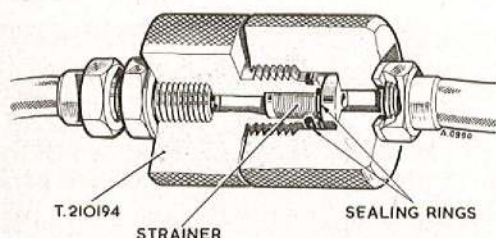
Pressure drop testing the rocker lever strainer assembly
